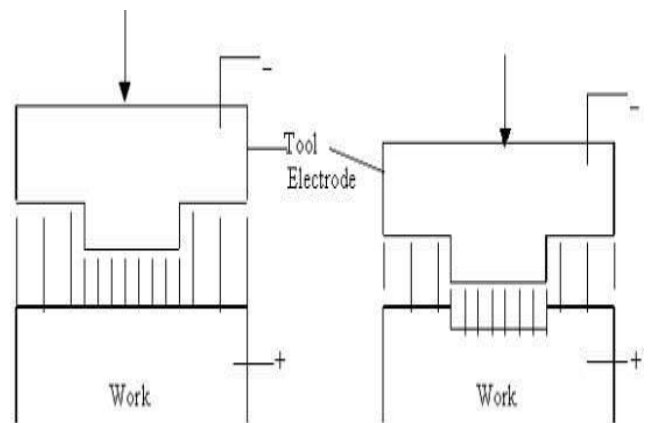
Schematic Workpiece-Tool Diagram for ECM
